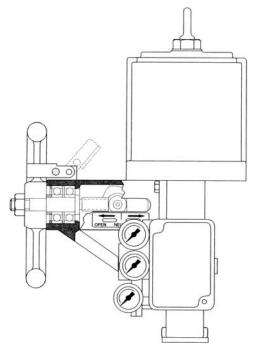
Internal view of auxiliary sidemounted handwheel mounted on a piston cylinder actuator. (*Courtesy of Valtek International*)
